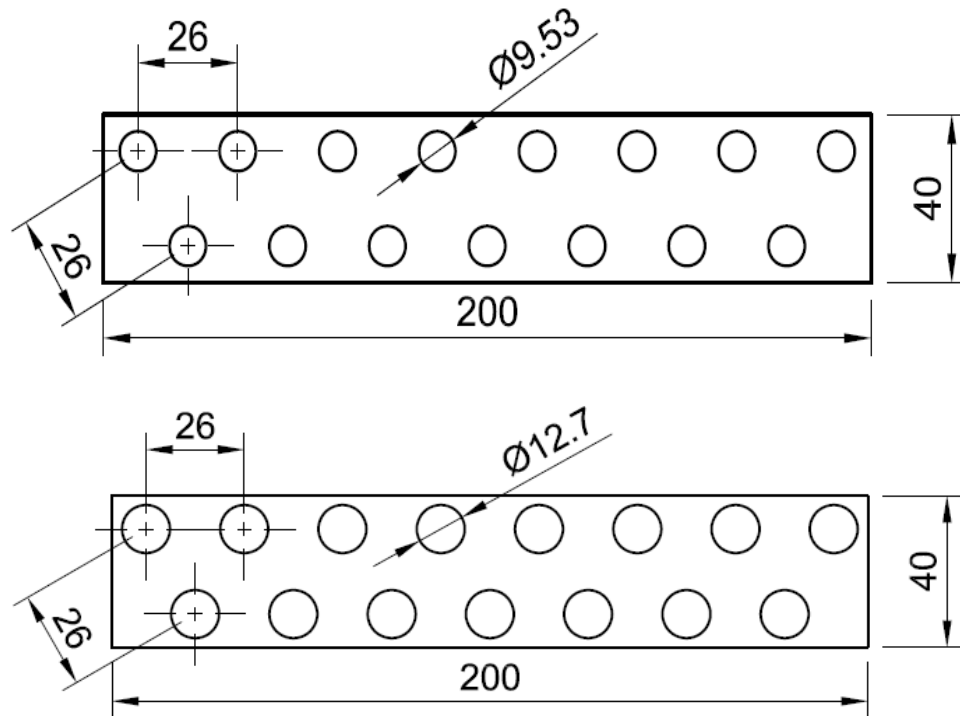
Tube bank tube layout (OD of 9.53 mm and 12.7 mm)
